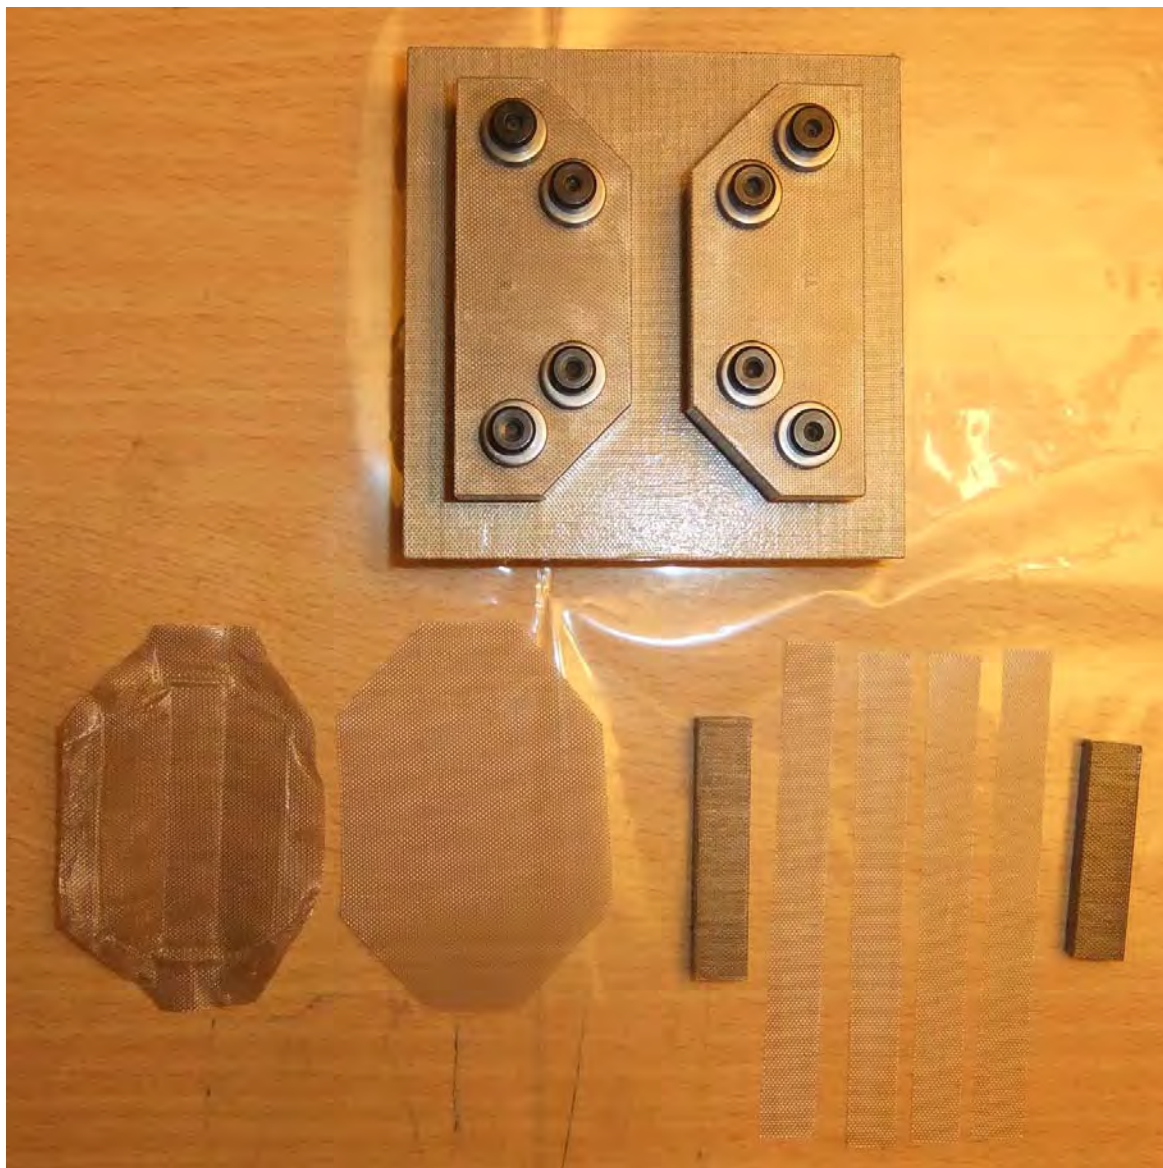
, Assembled Composite Lay Up Jig Top Down View
